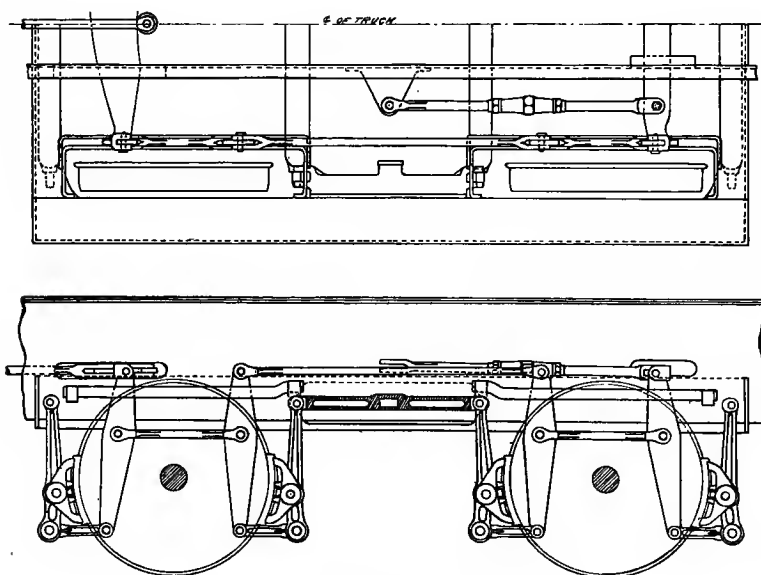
BRAKE RIGGING, THE NO. 3 CLASP BRAKE
